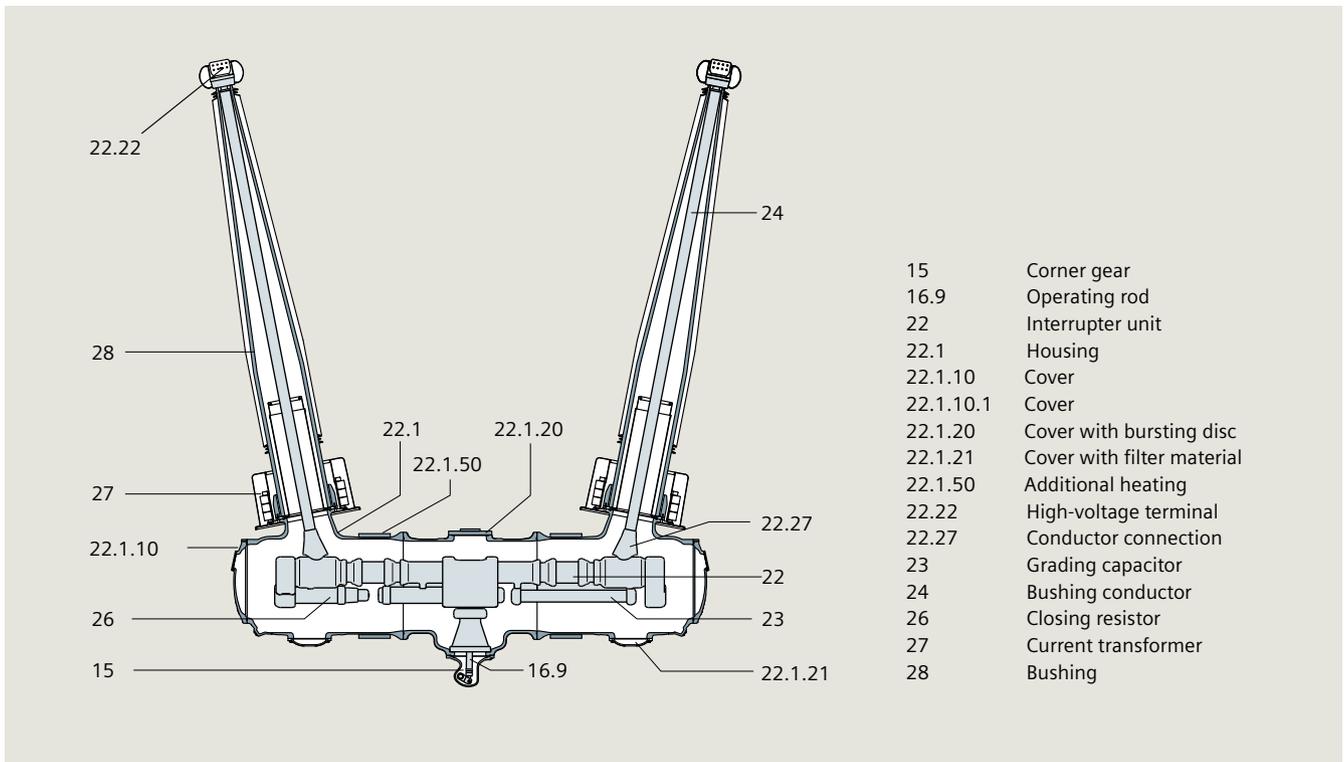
Sectional view of a 3AP2/3-DT circuit-breaker pole
